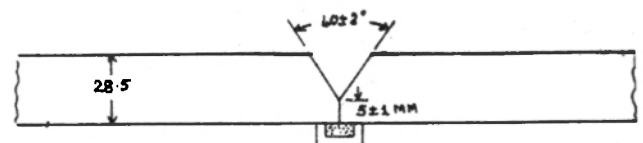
JOINT DESIGN FOR ONE SIDE FCB WELDING
